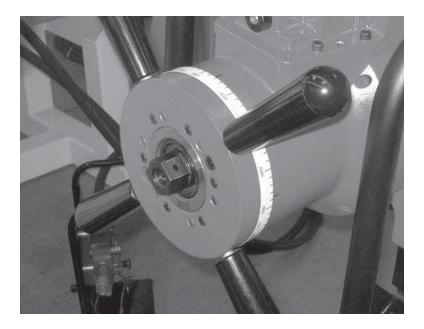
Engage the mandrel threads fully in the feed nut for stable operation.
